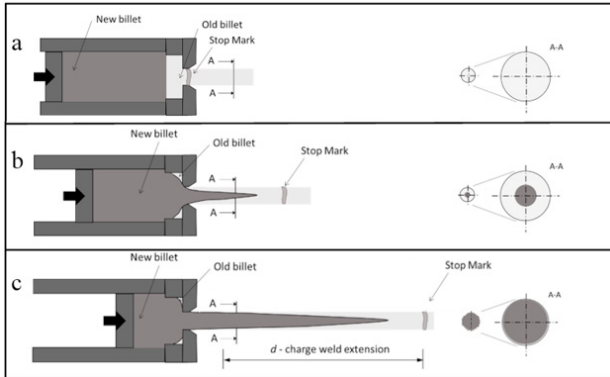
Schematic view of the charge weld evolution for a round solid bar: (a) beginning of the process stroke, (b) charge weld formation, (c) charge weld extension.
